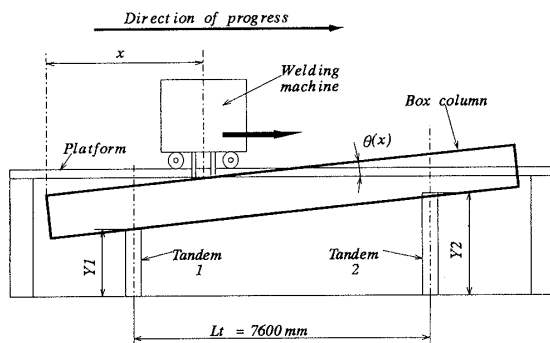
Schematic view of continuous arc welding equipment
